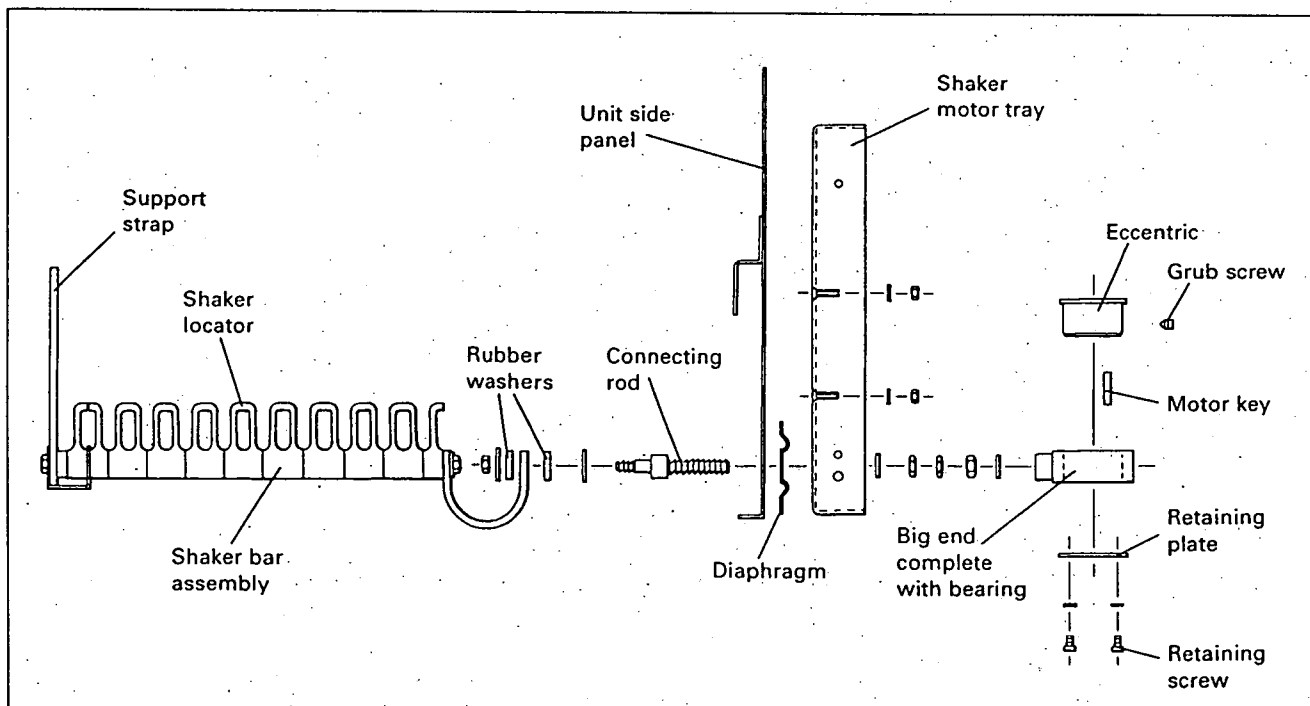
Exploded diagram of standard UMA shaker assembly with motor and cover removed
